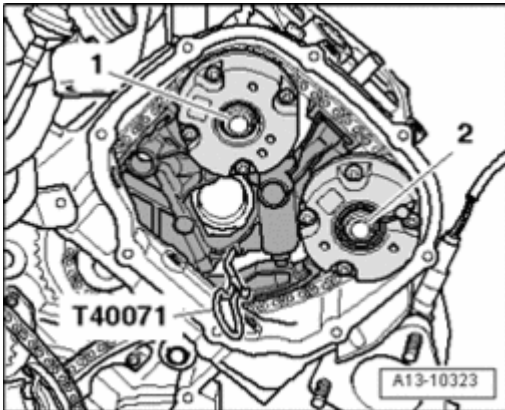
Identifying Bolts On Right Cylinder Head And Removing Both Camshaft Adjusters
